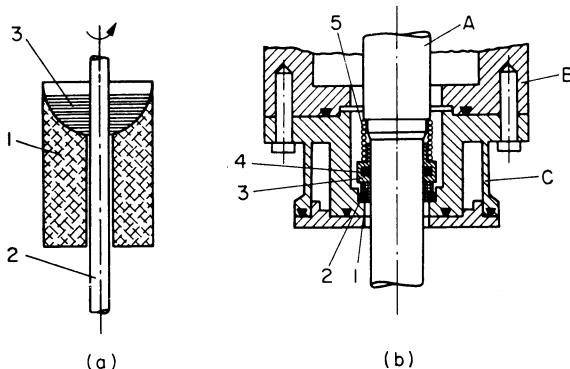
Oil-sealed rotary joints: (a) glass capillary (after Trevoy¹²³⁷); (b) ring seal. After Sikorsky¹¹³⁶ (*Courtesy of the Institute of Physics and The Physical Society, London*)
